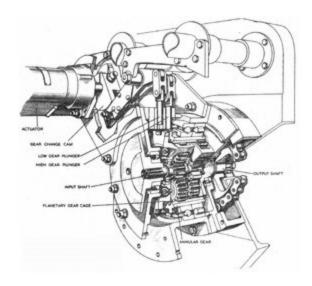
Mk XI hose-drum unit two-speed gearbox
